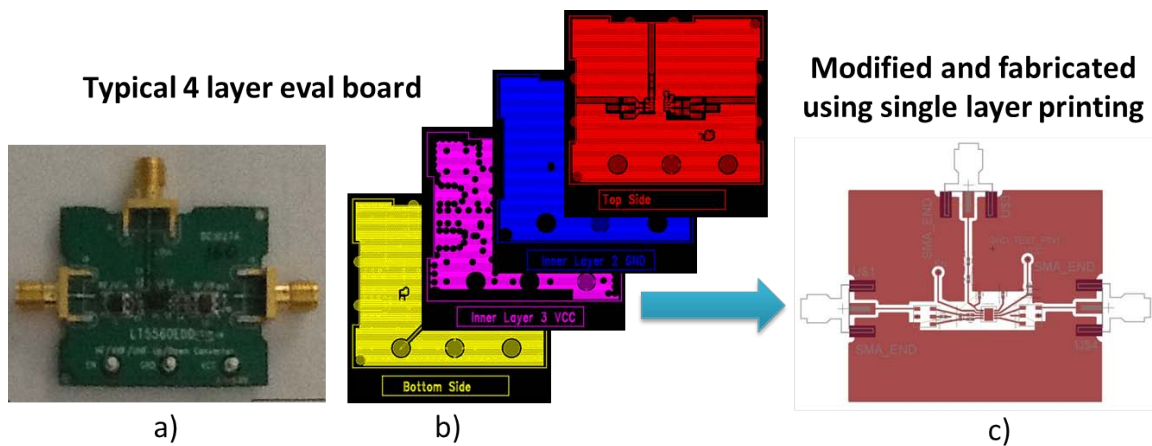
Commercial mixer (LT5560) reduced to single layer.
